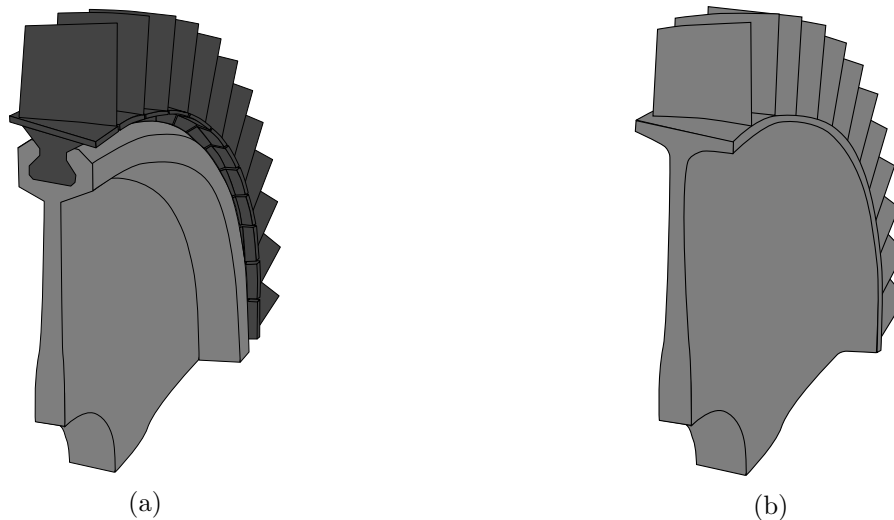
Quarters of bladed disks in turbomachines: classical assembly (a) and BLISK (b).
